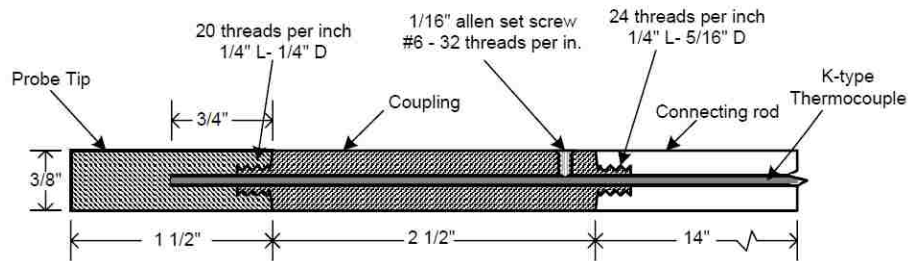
CHTE probe-coupling-connecting rod assembly [76].
